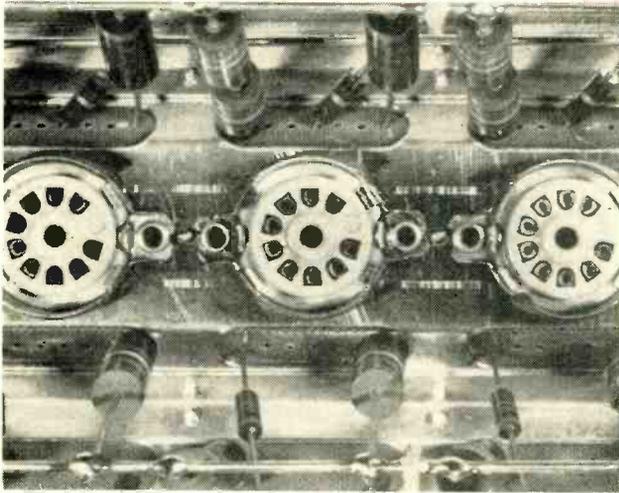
Top-view closeup of multigang assembly of basic chassis
